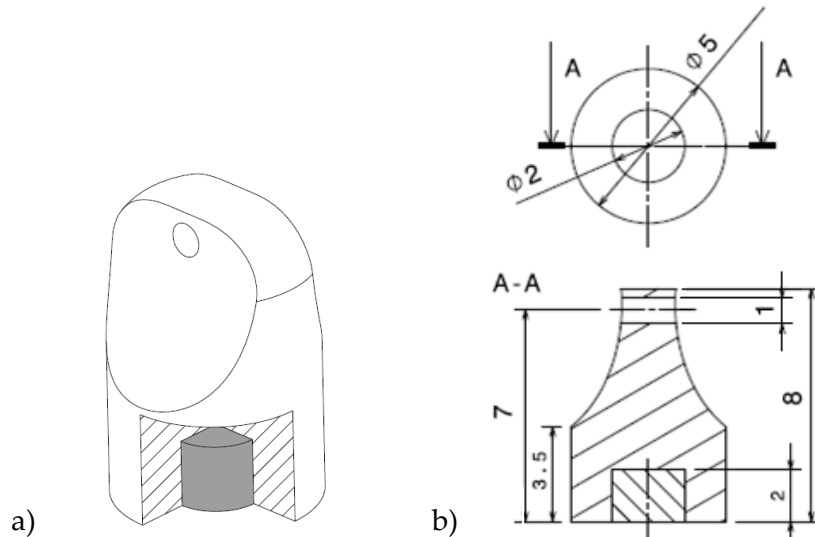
Part that connects the spring to the magnet a) 3D isometric view and b) 2D representative drawing.
